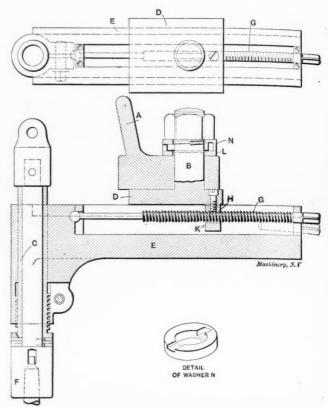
Details of Bocorselski's Device for Rapid Adjustment of Multiple Drill Spindles.
